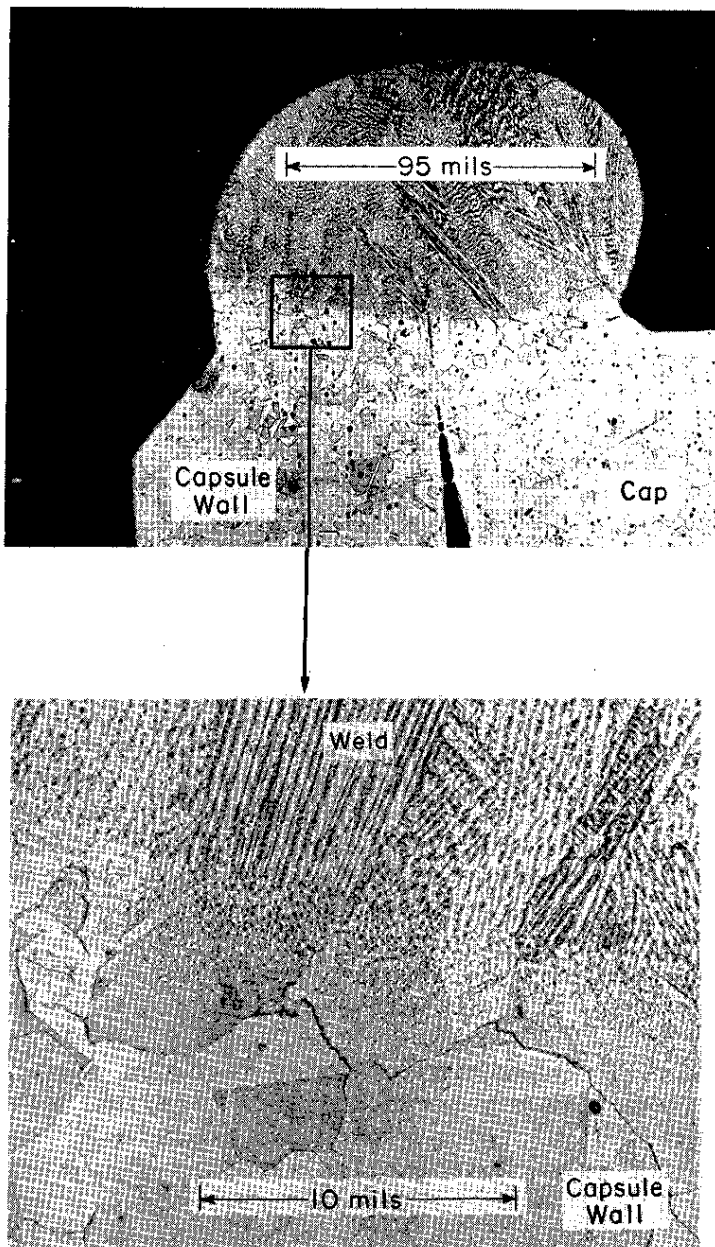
INTERGRANULAR CRACKS IN HEAT-AFFECTED ZONE OF "HAYNES" 25 WELD
